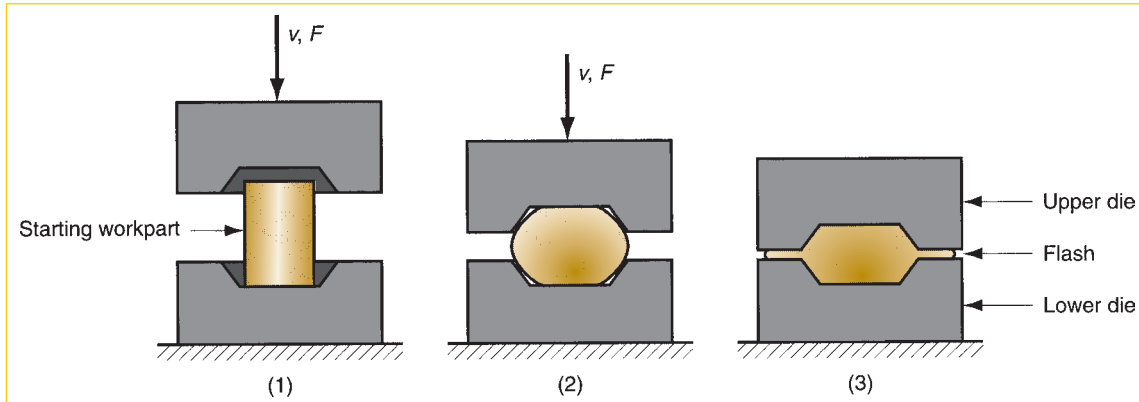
Sequence in impression-die forging: (1) just prior to initial contact with raw workpiece, (2) partial compression, and (3) final die closure, causing flash to form in gap between die plates.
